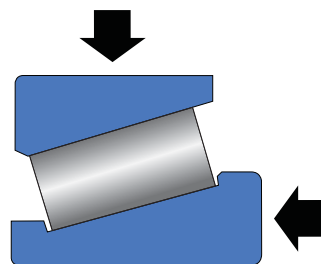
Tapered roller bearing can carry radial and axial load
